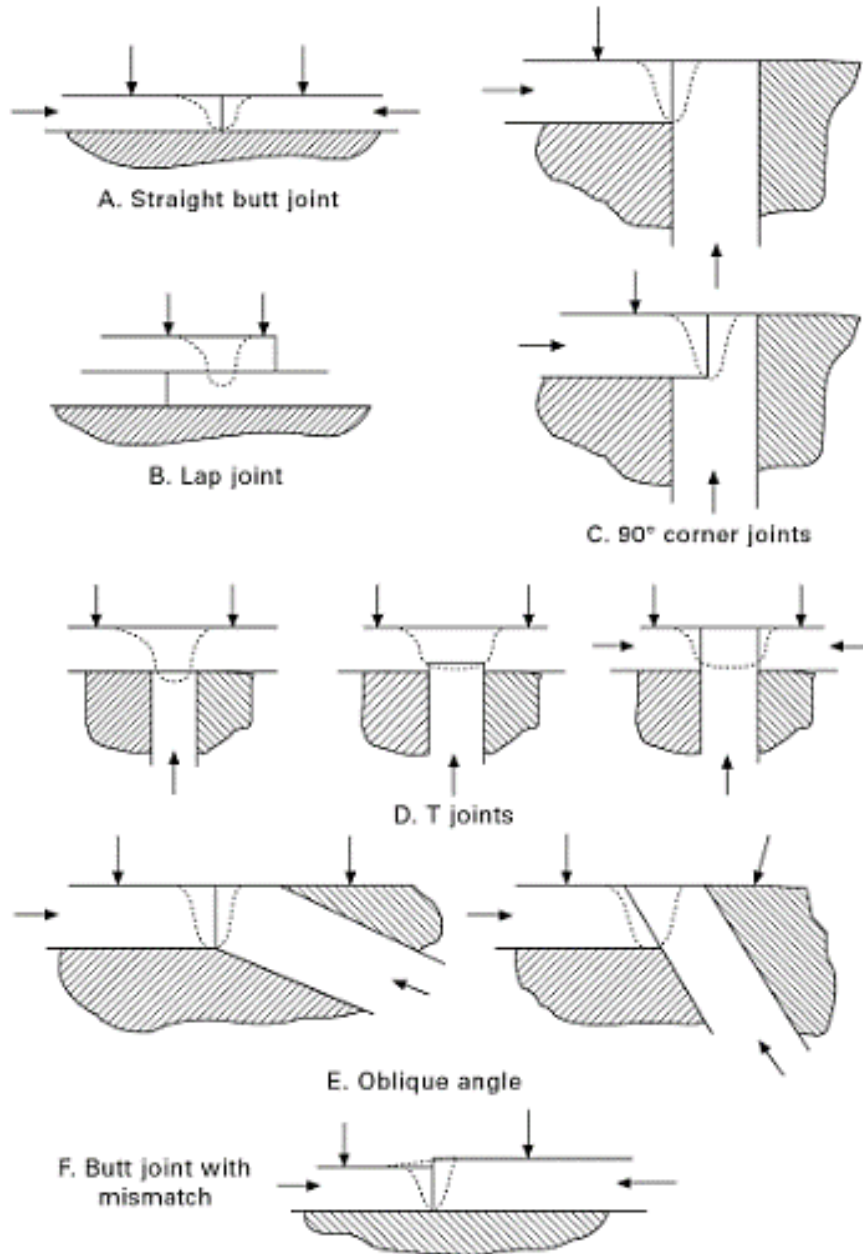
Weld geometry illustrations and fixture force requirements [3]
